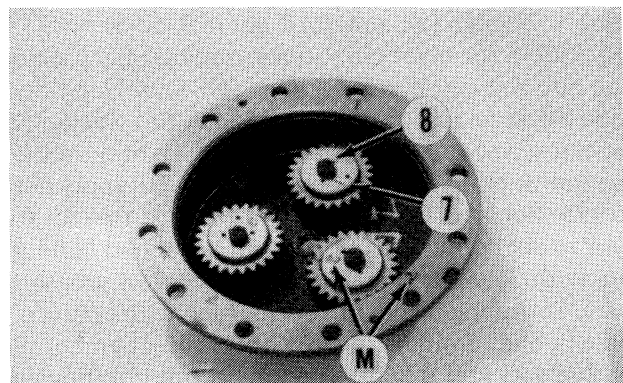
Prior to disassembly, mark planet pinions (7), retainers (8) and carrier housing so that all components can be reinstalled in original positions if reused.
